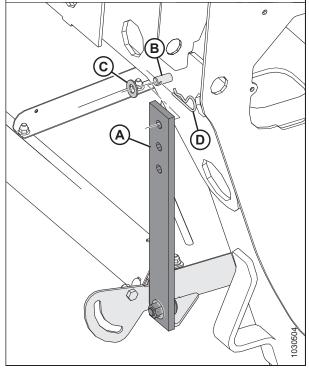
Rubber Strap — Right Side of Forming Shield
